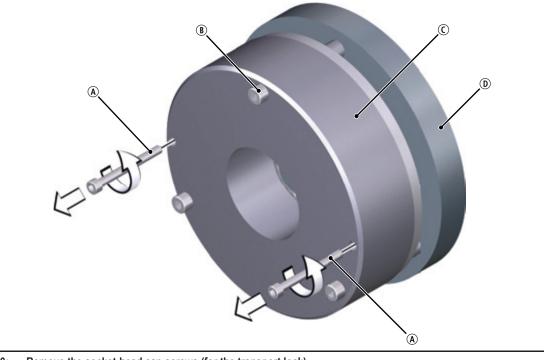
Remove the socket-head cap screws (for the transport lock).
